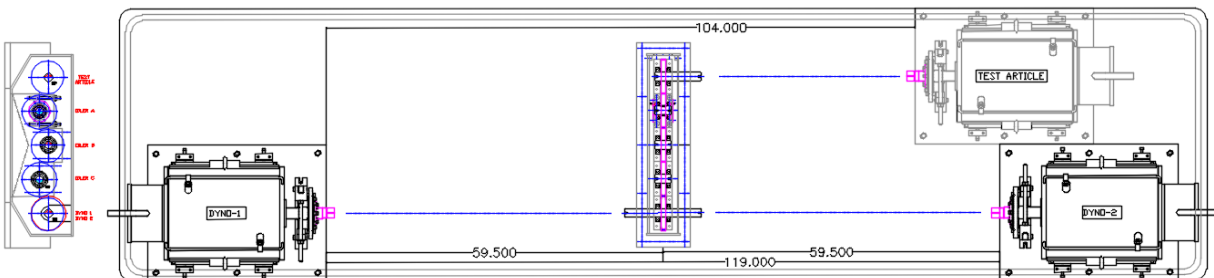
Test motor and test components with 2x increased load capacity, alternate configuration. Dimensions are shown in units of inches.
